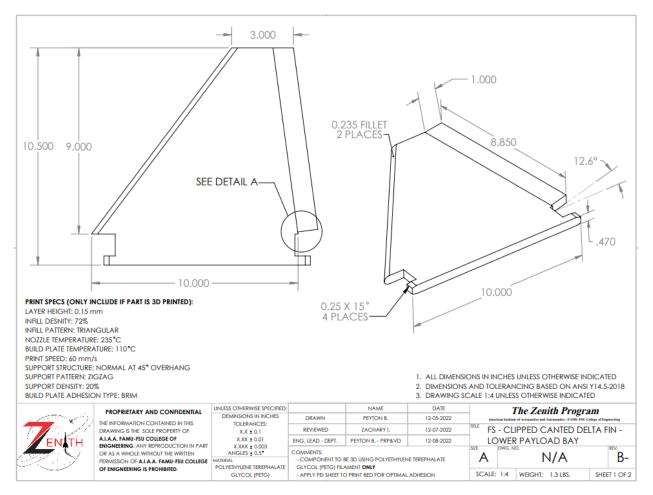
Canted Clipped Delta Fin CAD Drawing Sheet 1 of 2
